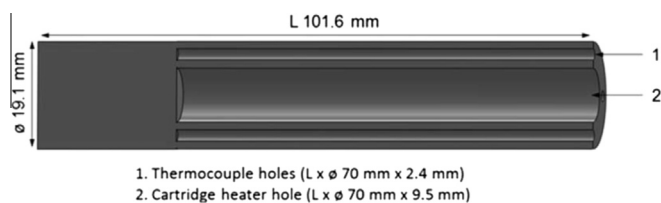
Cross-sectional view of Al 6061 heater section used for pool boiling experiments.
